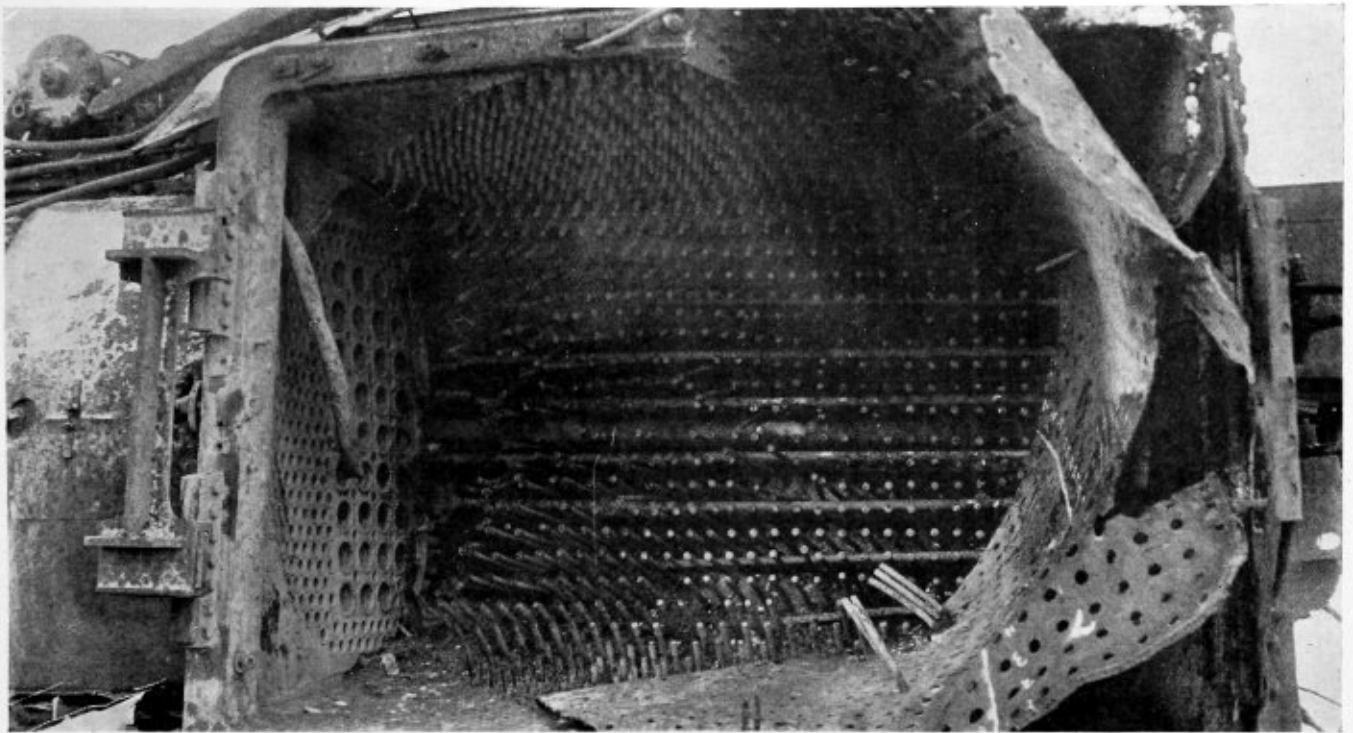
Typical Crown Sheet Failure Caused by Low Water
